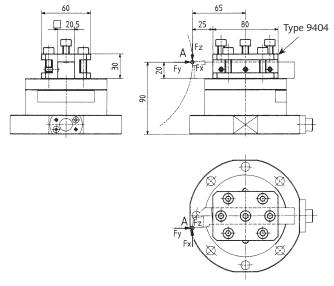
Dimensions Dynamometer Type 9272 with mounted tool holder Type 9404
